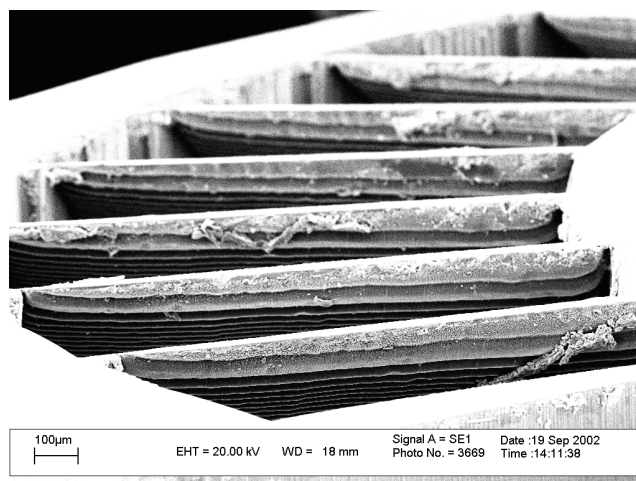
Trailing blade edges with sidewall trenches and slope taper
